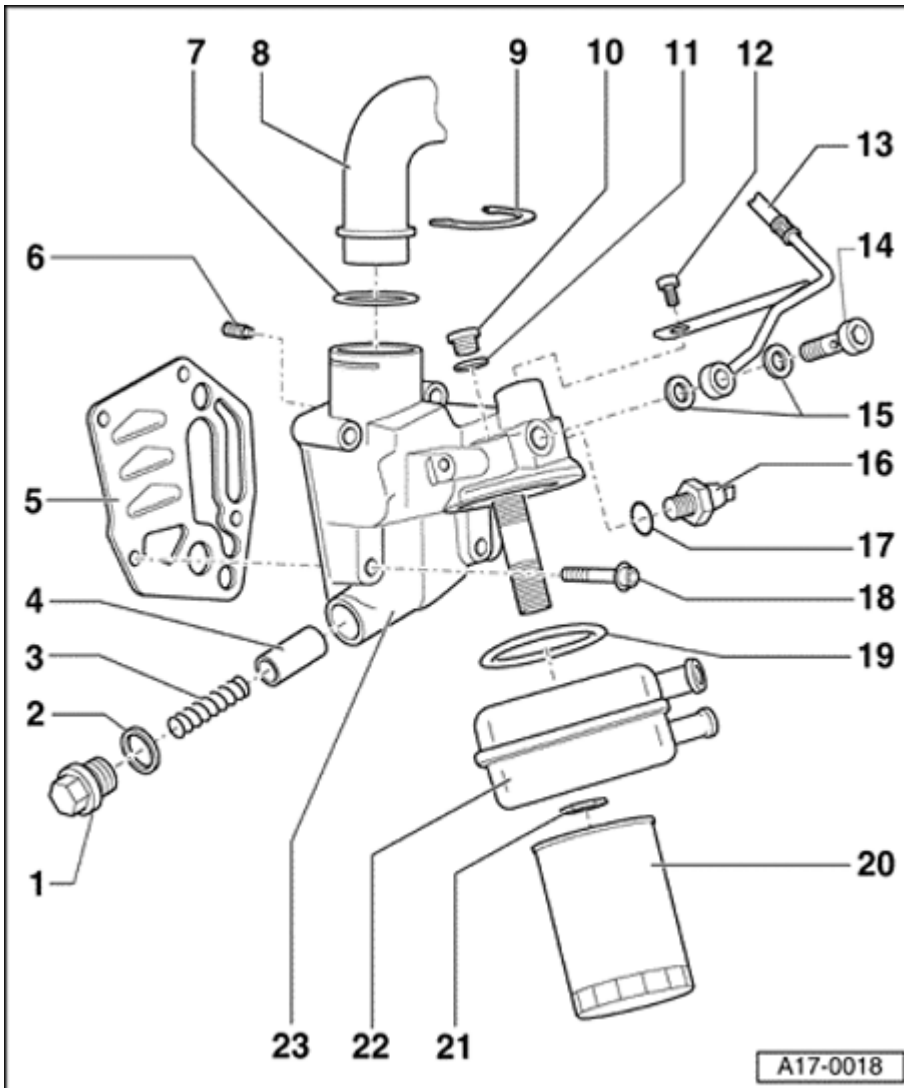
Lubrication System Components, Removing And Installing Overview - Part II
